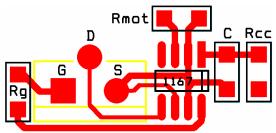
Single side board, TO220 MOSFET, OVT grounded, solder side view, SMD gate resistor.
